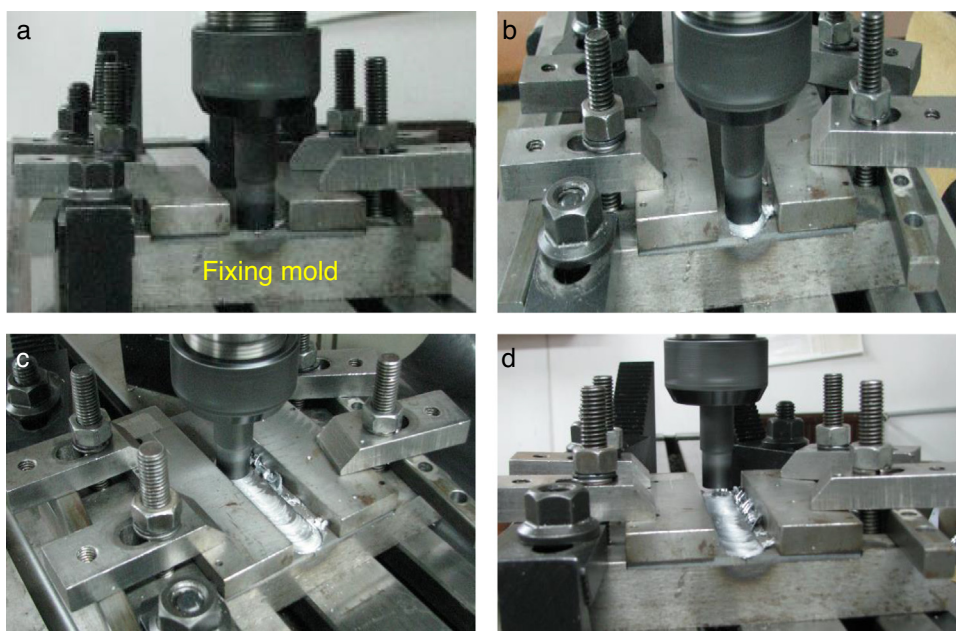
Stages of FSW Process: (a) rotating tool prior to penetration into the butt joint; (b) tool shoulder makes contact with the part, creating heat; (c) restricting further penetration while expanding the hot zone and moving parts under the tool, creating a friction stir weld nugget; (d) retraction of the tool from the joining zone.
